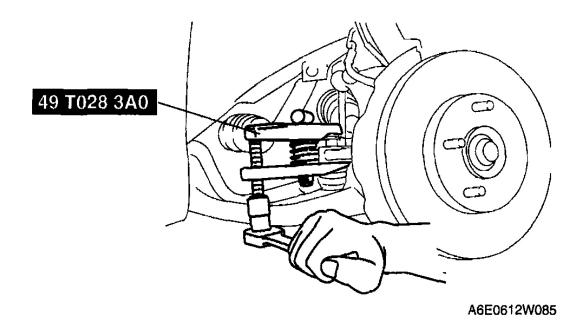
Separating Tie-Rod End From Steering Knuckle Using SSTs Courtesy of MAZDA MOTORS CORP.
